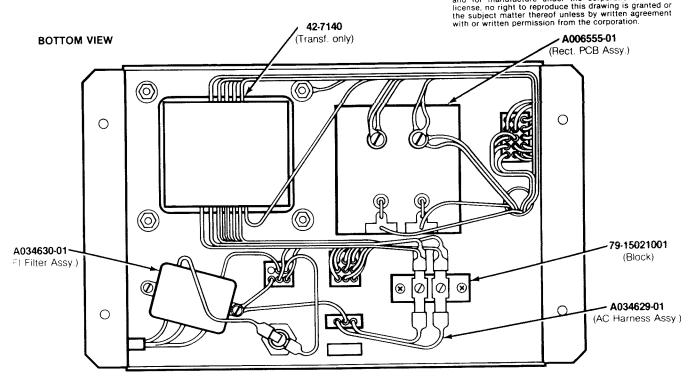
Power Supply Assembly for Raster-Scan Games A034560-02 D
